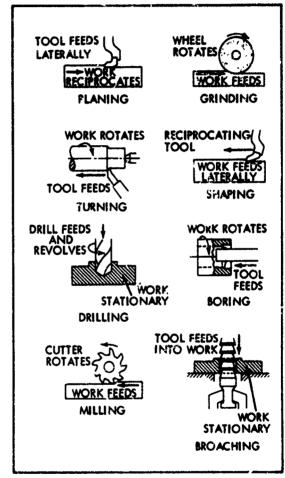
Basic Machine Tool Motions for Removing Material
